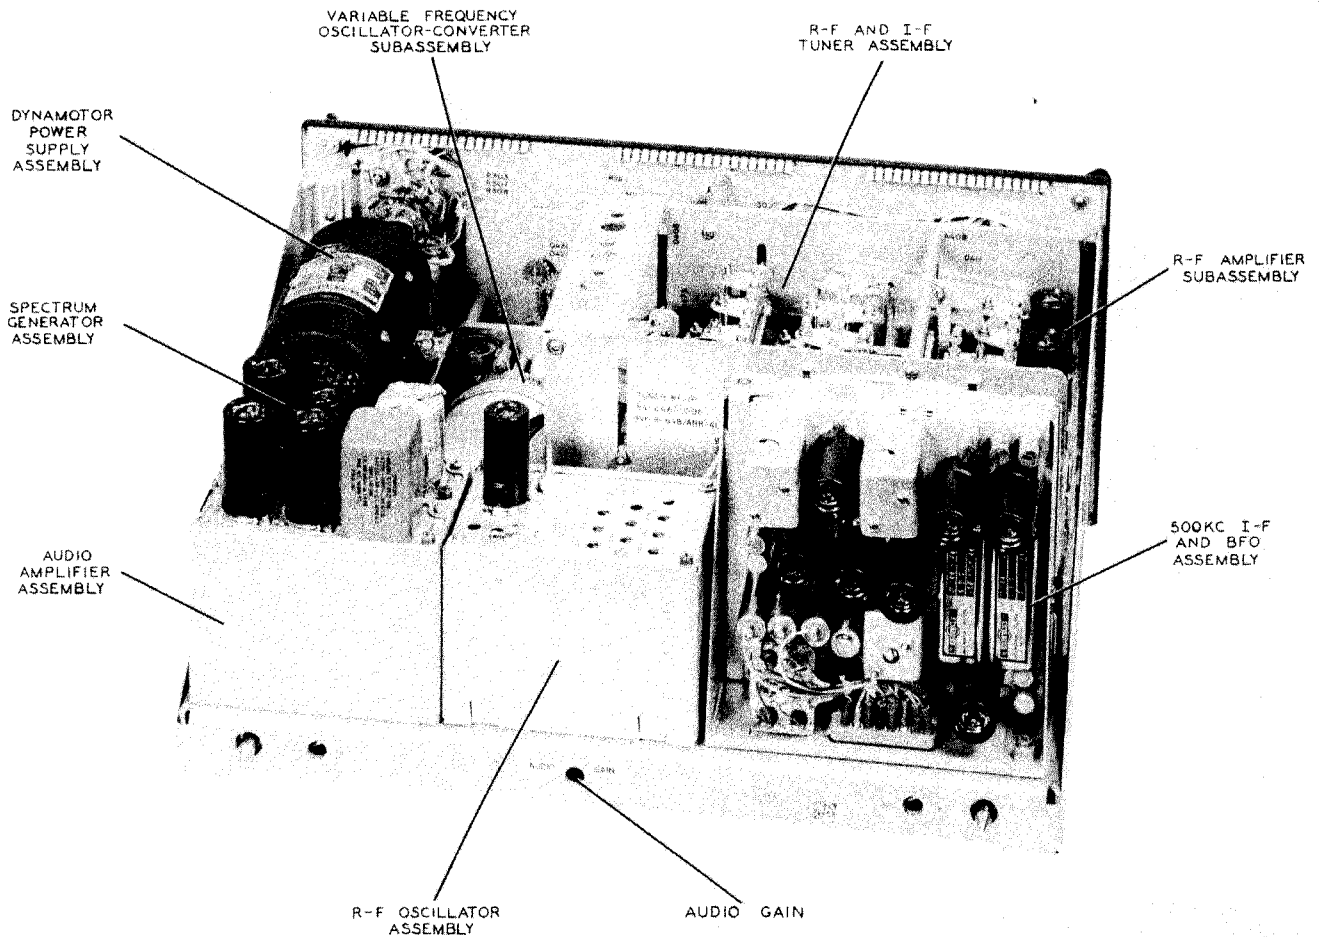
Radio Receiver R-648/ARR-41, Top Rear View, Cover Removed
